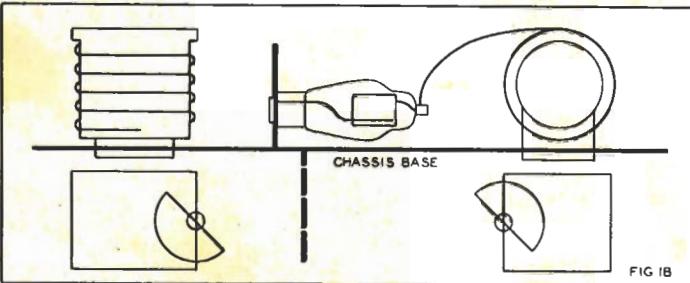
A preferred mechanical layout for the same tube which reduces feedback to a minimum.
